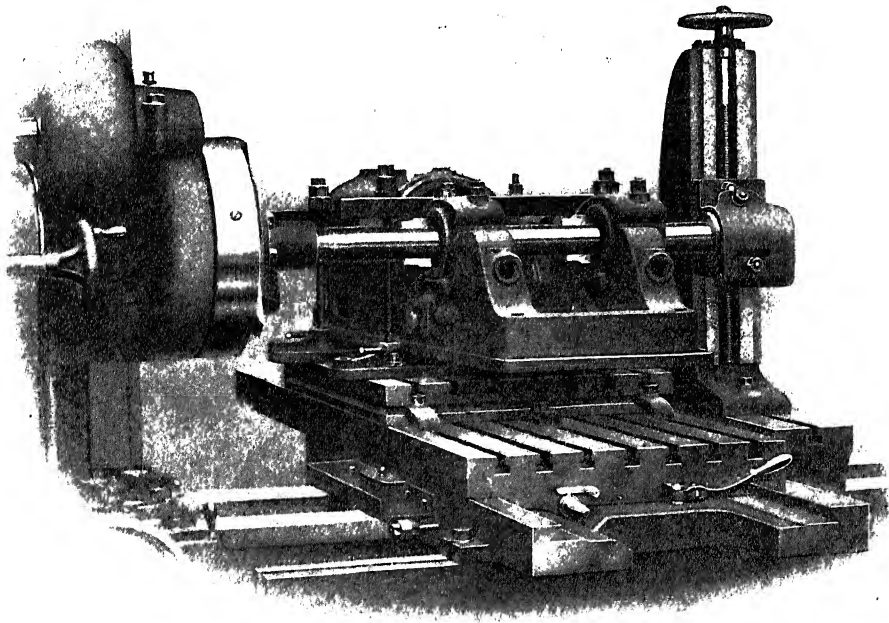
Boring and Facing Crank-shaft Bearings of Gas-engine Bed
